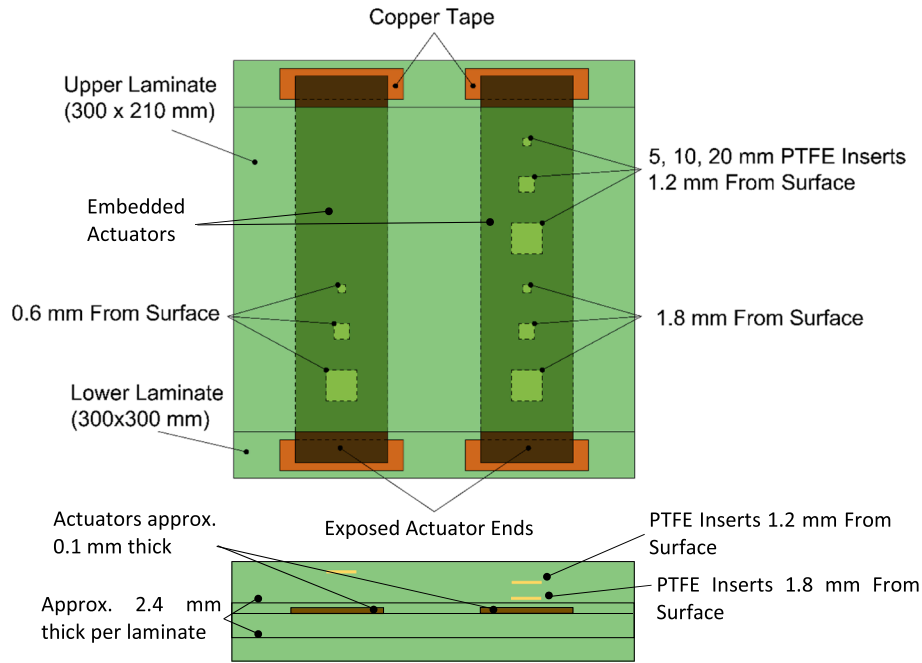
Schematic of test specimen showing two sensors and three sets of Teflon inserts (not drawn to scale).
